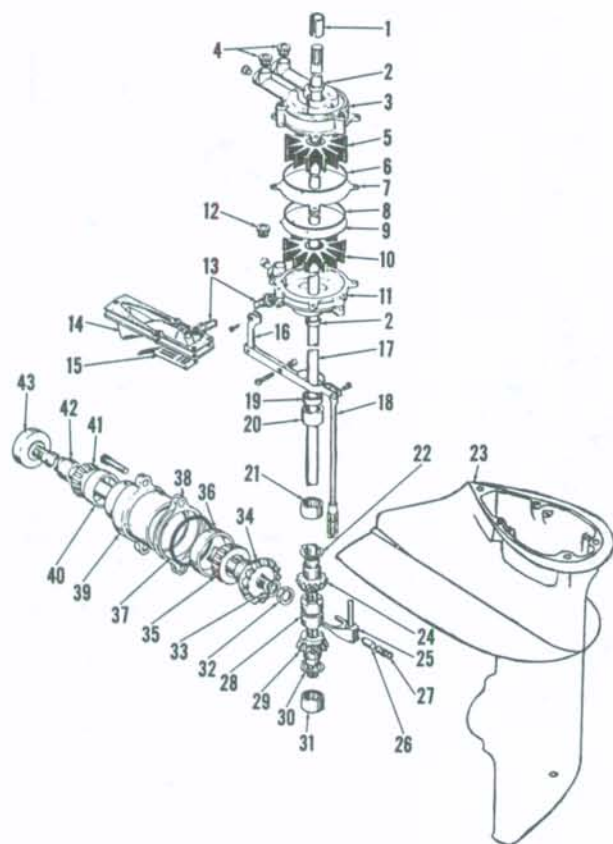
Exploded view of lower unit gearcase and associated parts used on OX 140.
